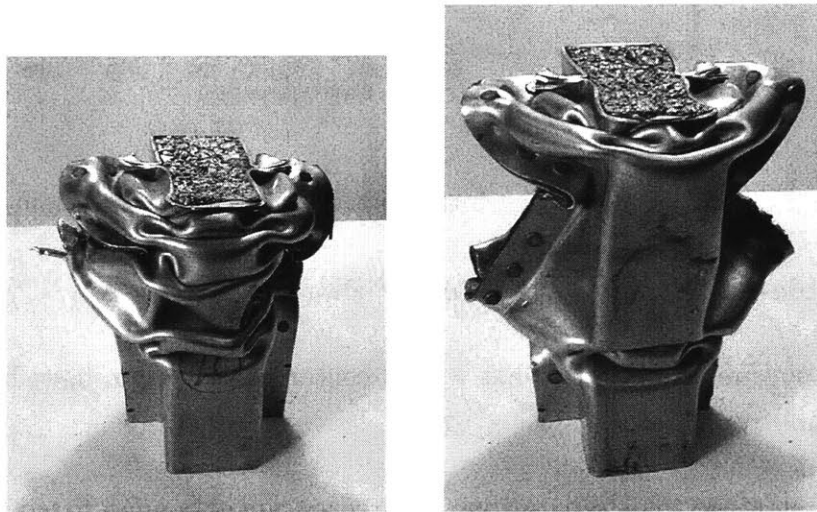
Crush deformation of double-hat foam-filled columns. Left: specimen S10. Right: specimen S8
